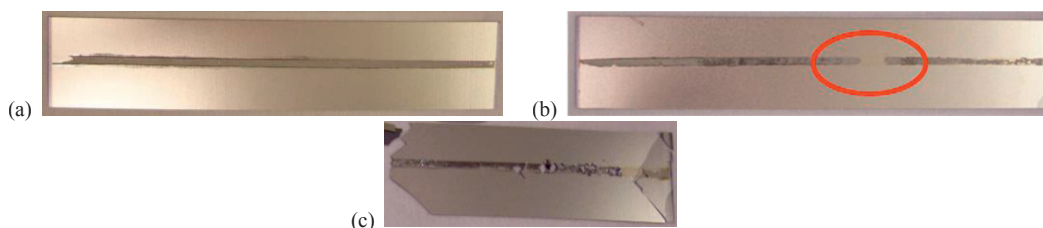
Metalized Si-wafers after peel test. Figure (a) shows a fracture in the solder, in Figure (b), the red mark presents a not – contacted area, Figure (c) presents a sample with a fracture in the silicon named chipping.
